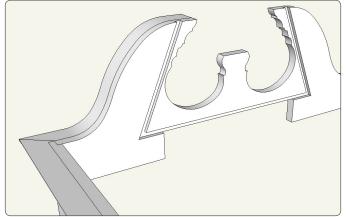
Create grooves on the rear face of the bonnet front to hold the pieces for the inner enclosure.
